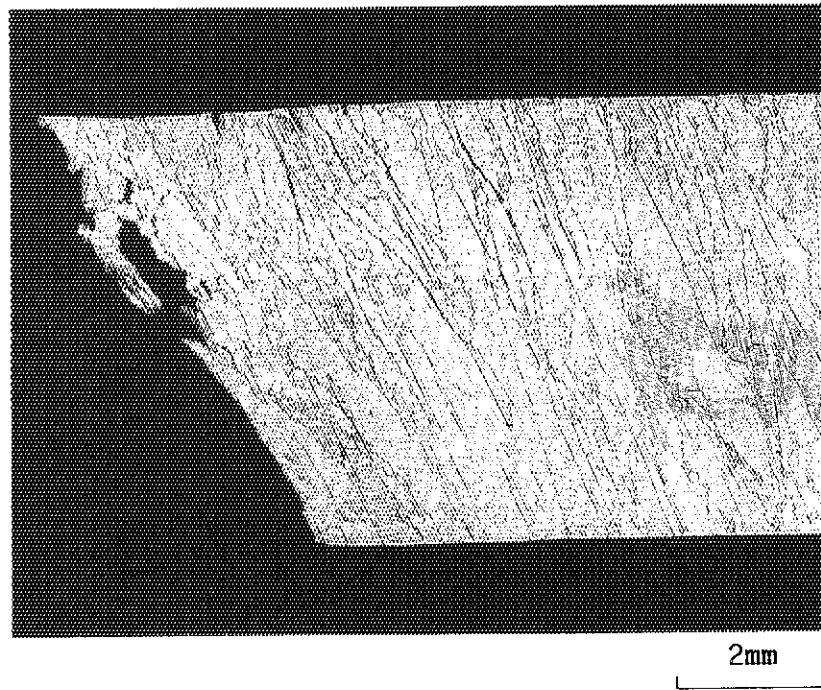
Microstructure of fracture section for Hastelloy XR weld metal (900°C, 696.3h, 45.0MPa, thickness: 15mm, specimen No.GD-2)
